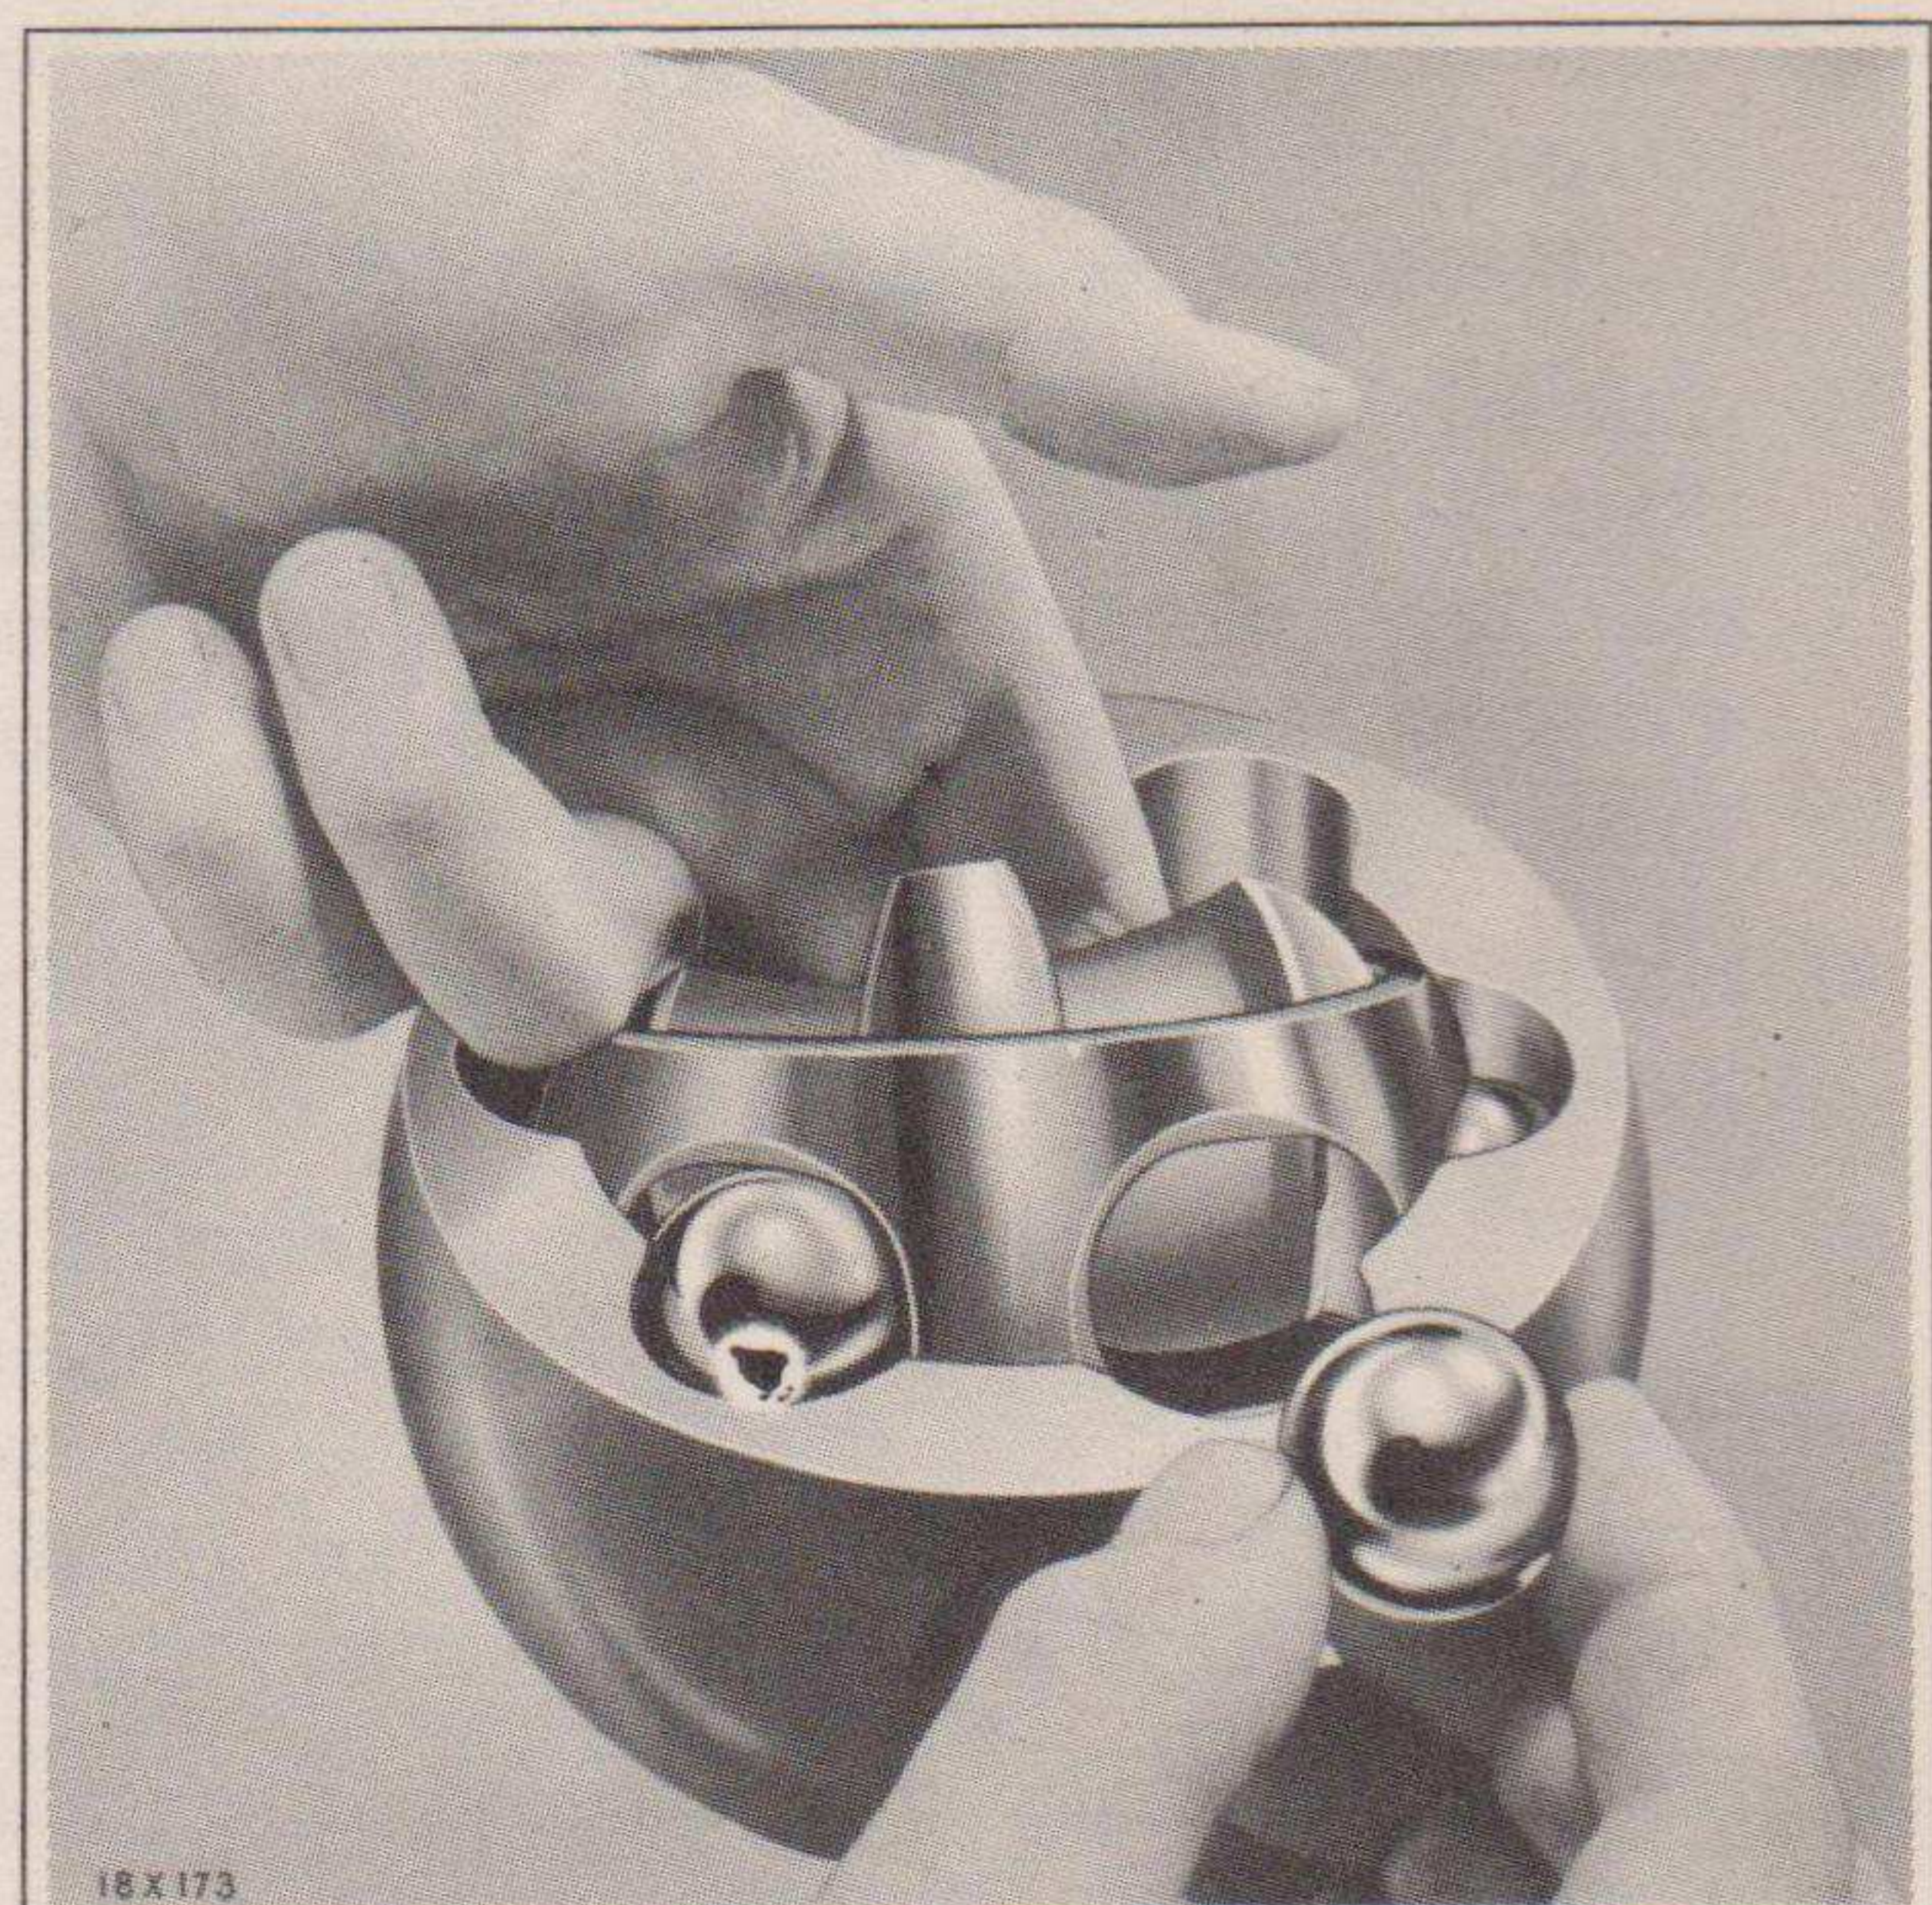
Removing Universal Drive Ball (Rzeppa)
